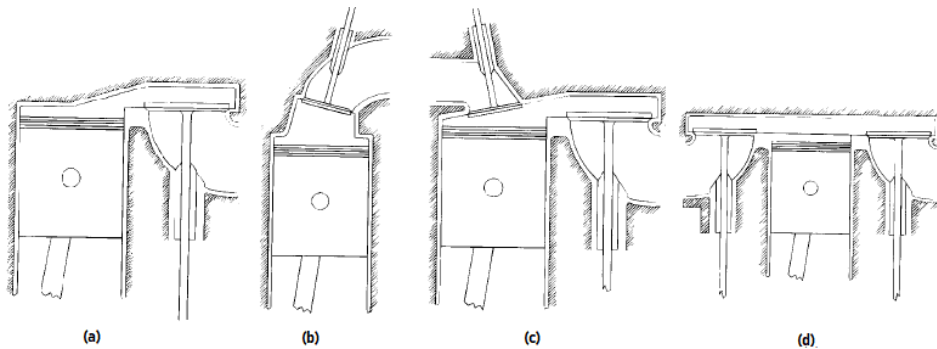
Engine Classification by Valve Location. Adapted from [5]. (a) L-head; (b) I-head; (c) F-head; (d) Valves in block on opposite sides of cylinder, T-head.
